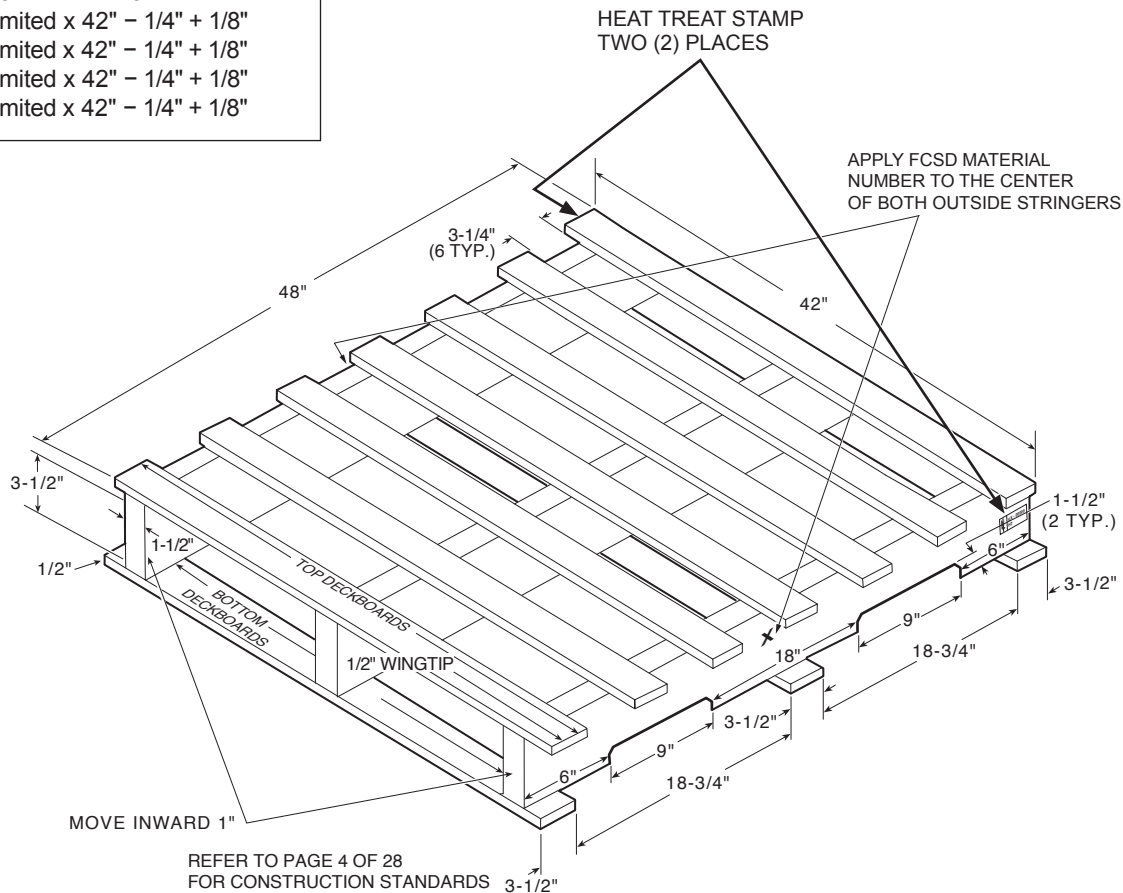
DETAIL BCAN - TYPICAL CONSTRUCTION STANDARDS
